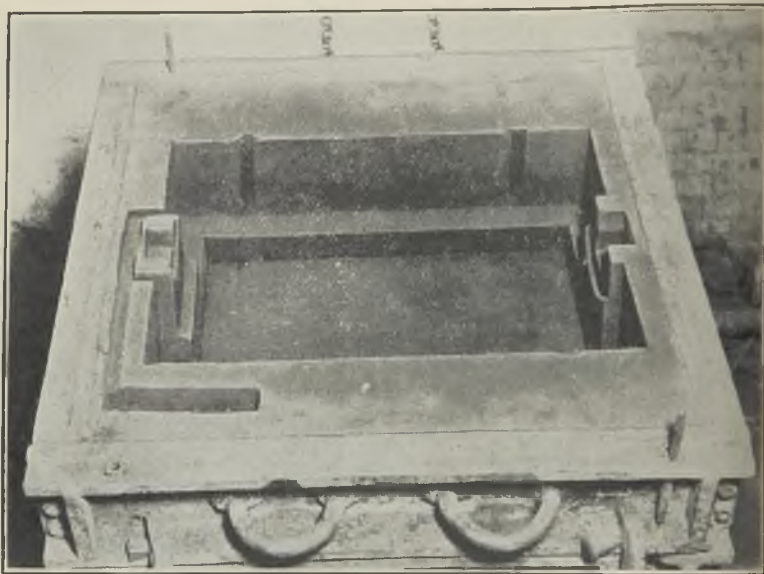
DRAG HALF MOULD FOR TURBINE-PUMP CASING.
